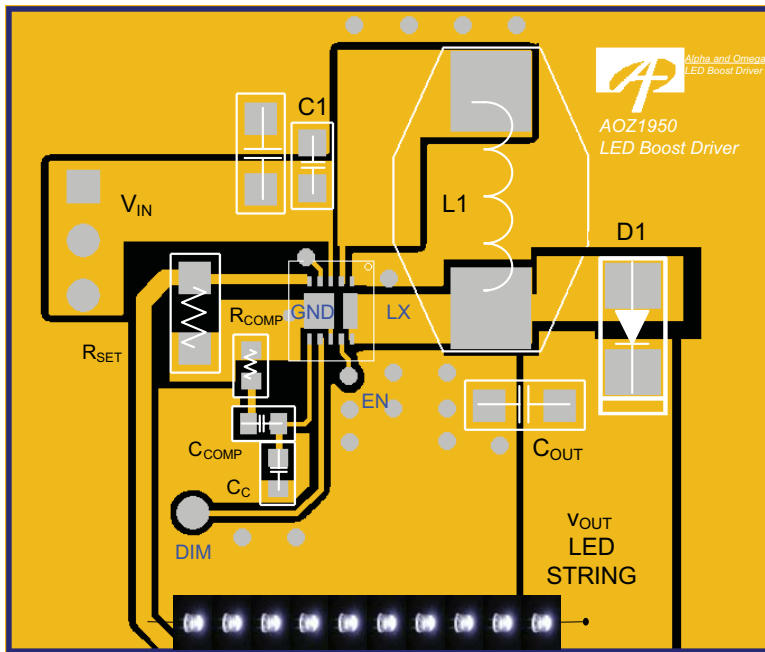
Example of AOZ1950 PCB Layout and DFN-10 Pin-out
